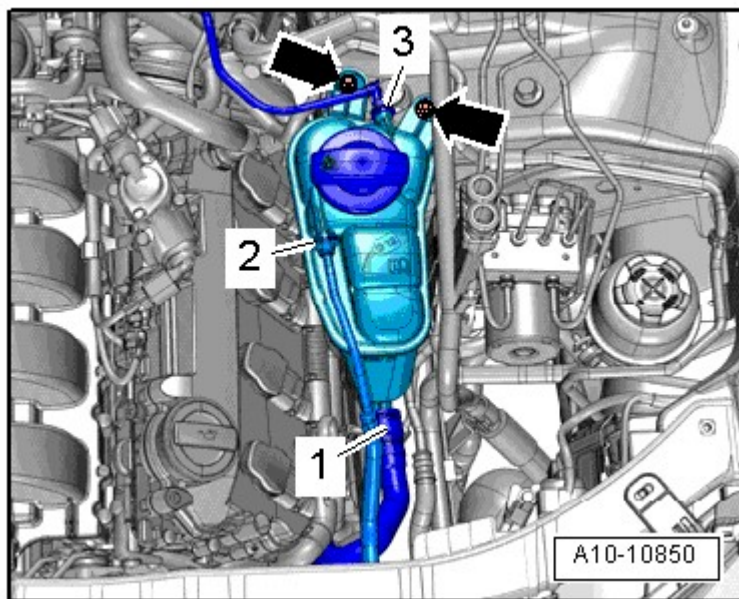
Identifying Coolant Hose And Coolant Reservoir
